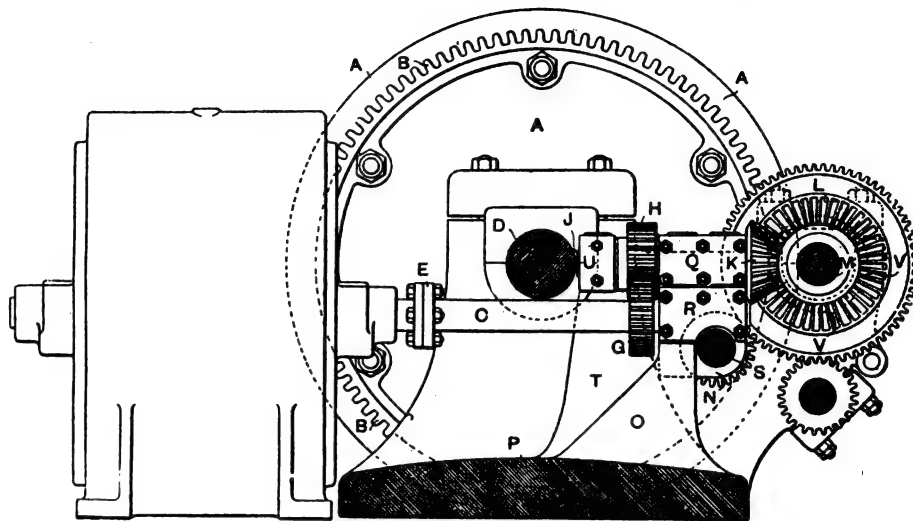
MOTOR-DRIVING ARRANGEMENT FOR LATHES.
